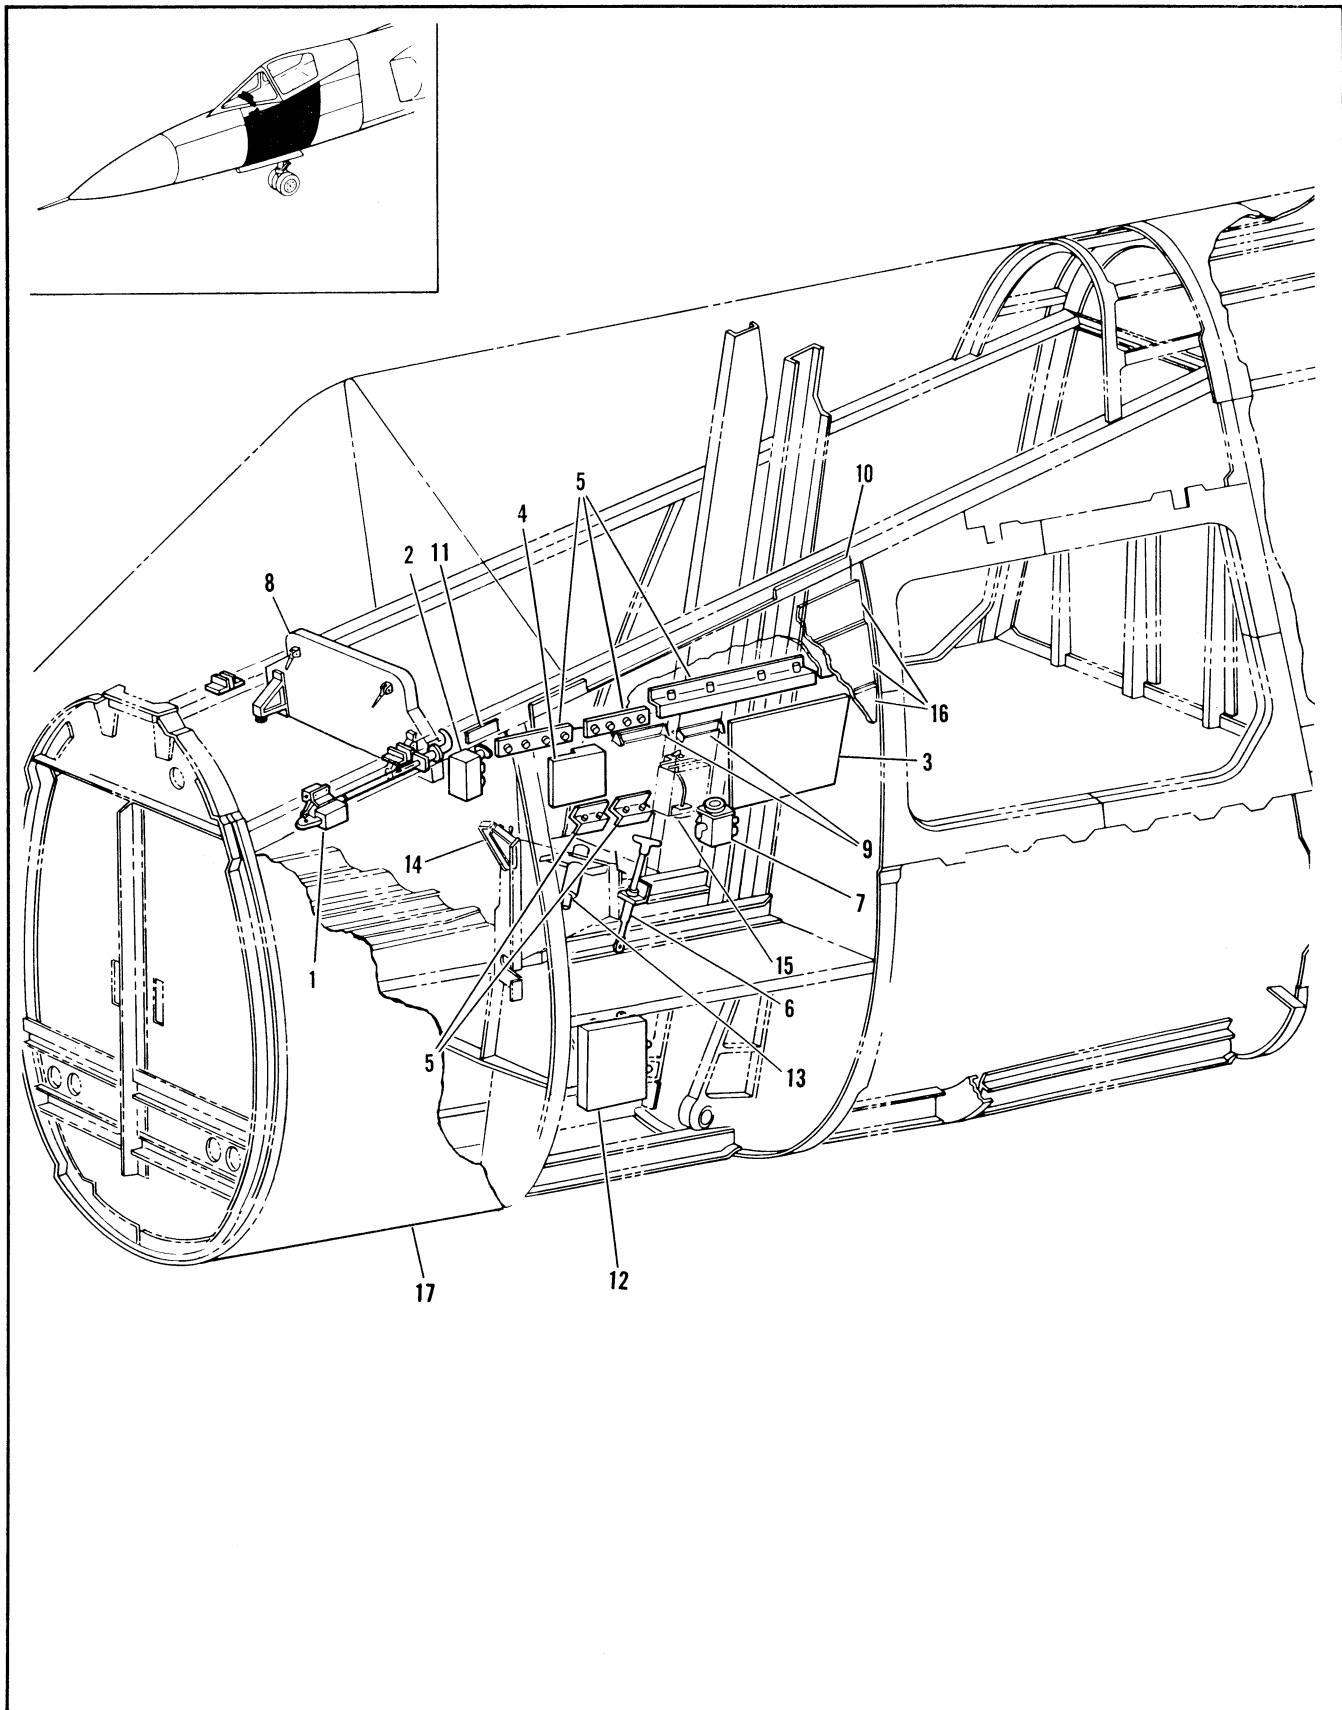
LH Side Panel Equipment Assembly Sta 102 to 172
